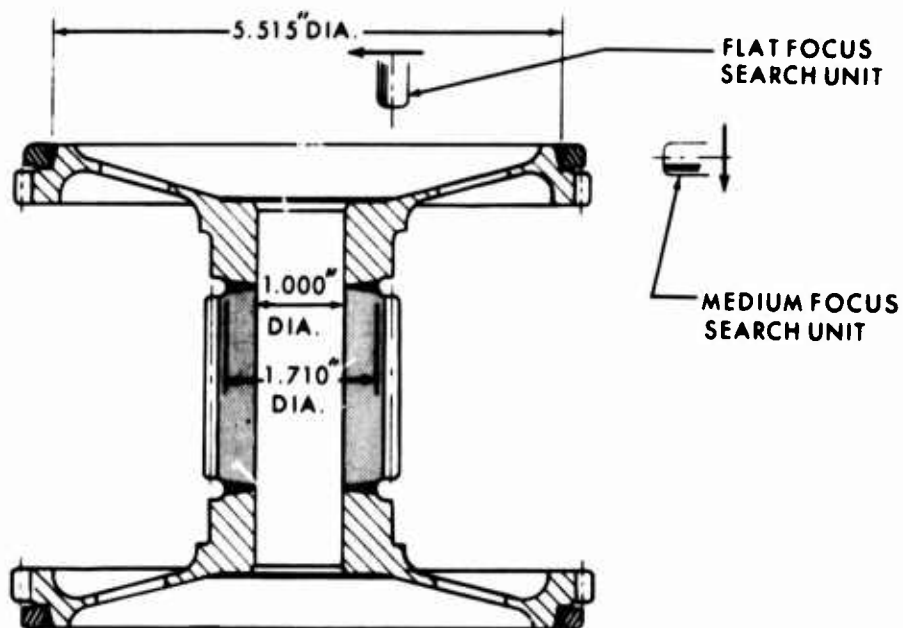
First-Row Pinion - Ultrasonic Inspection.
